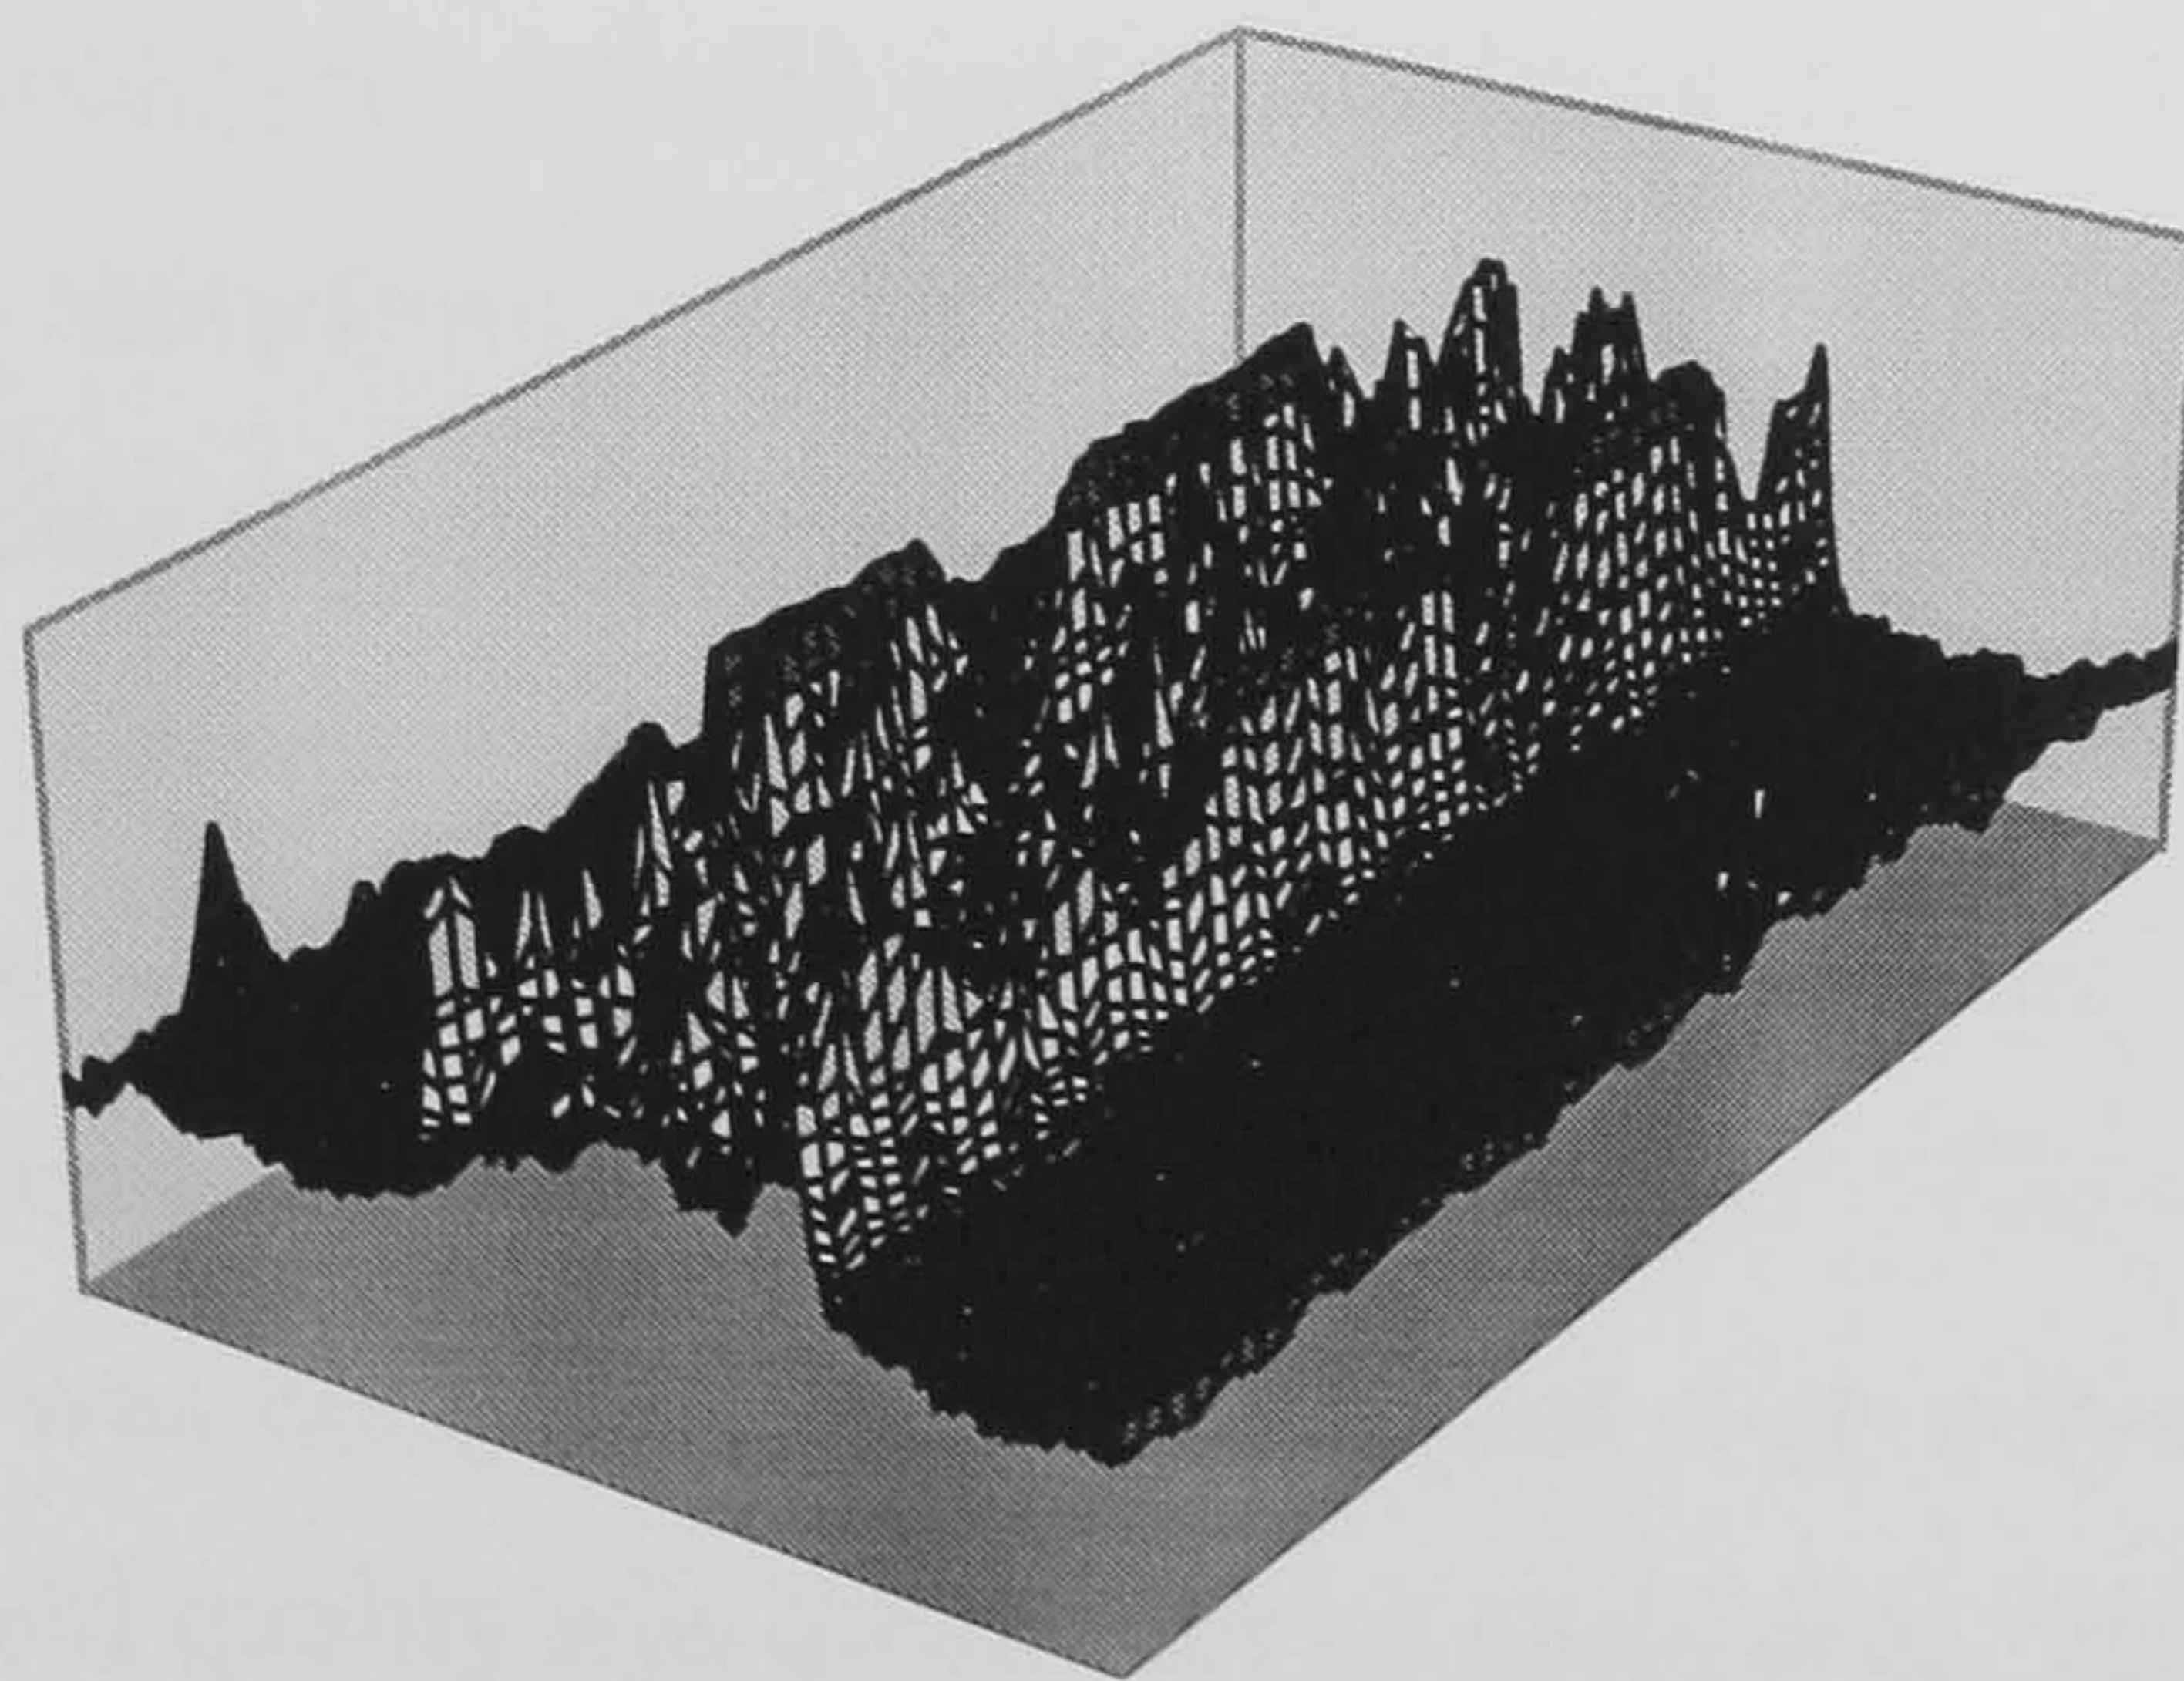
(b) shows the 3-D scan of the weld bead formation for flat welding geometry
